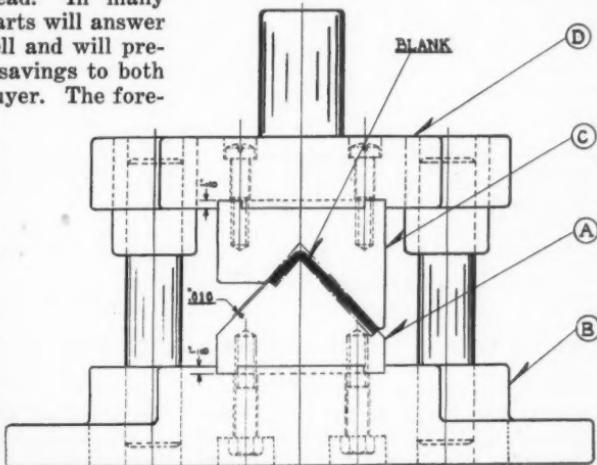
Drawing showing design of sizing die required to size the blank illustrated in Fig. 1.
